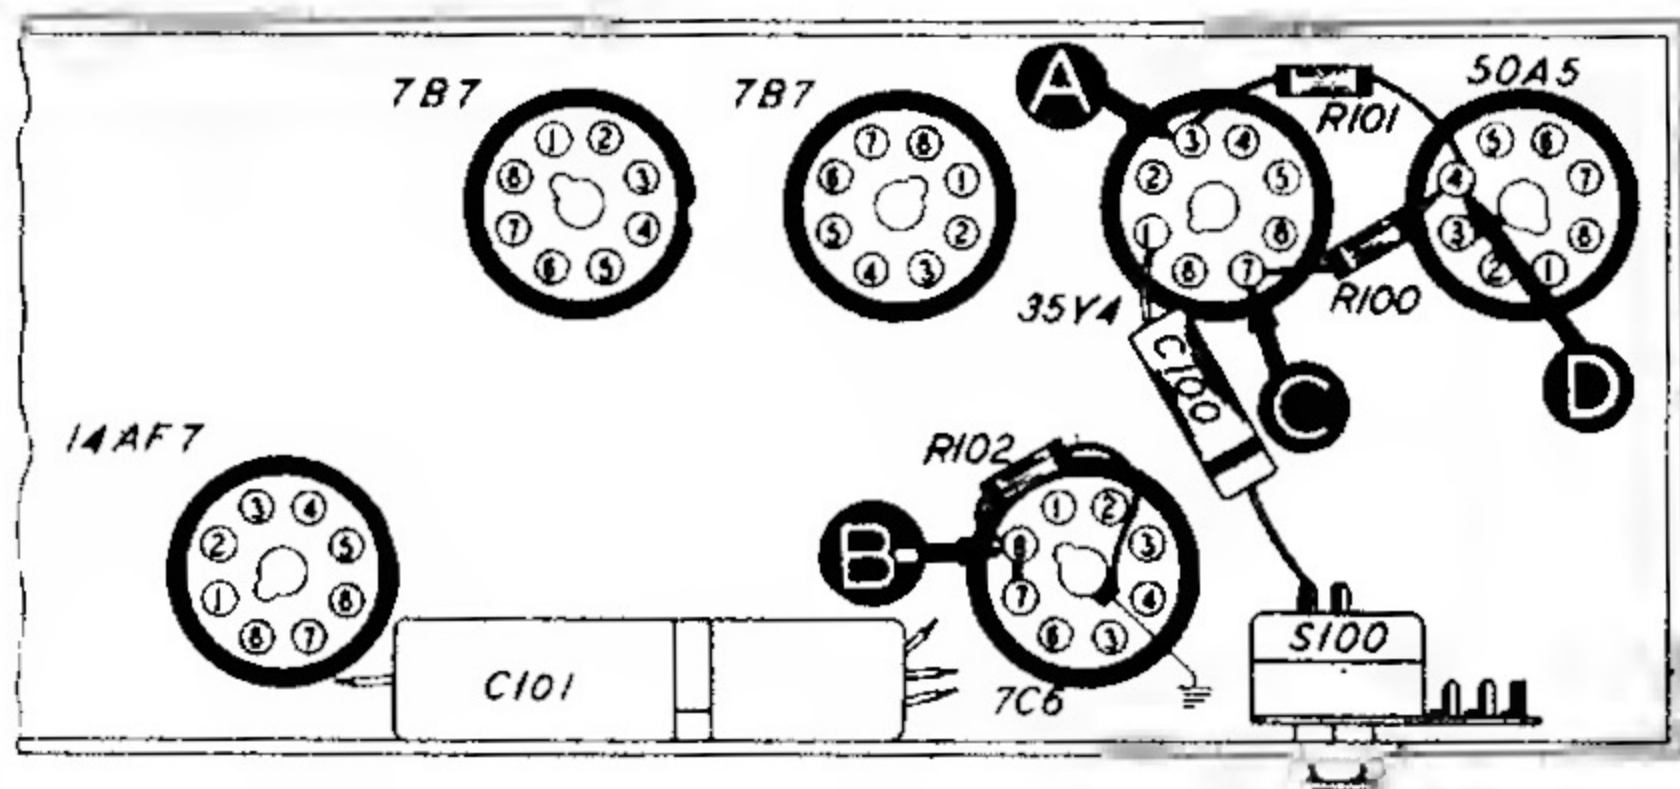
BOTTOM VIEW, SHOWING SECTION 1 TEST POINTS.
